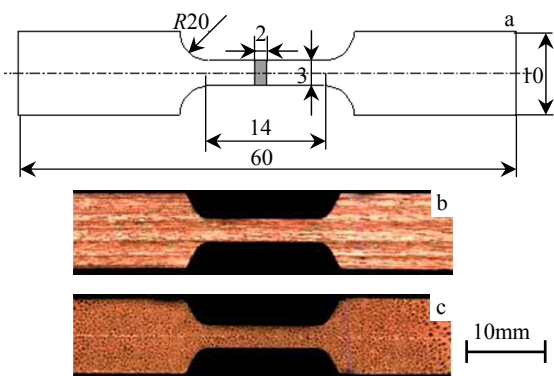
Size of tensile specimen (a) and specimens with pore axils: (b) parallel and (c) perpendicular to tensile direction
